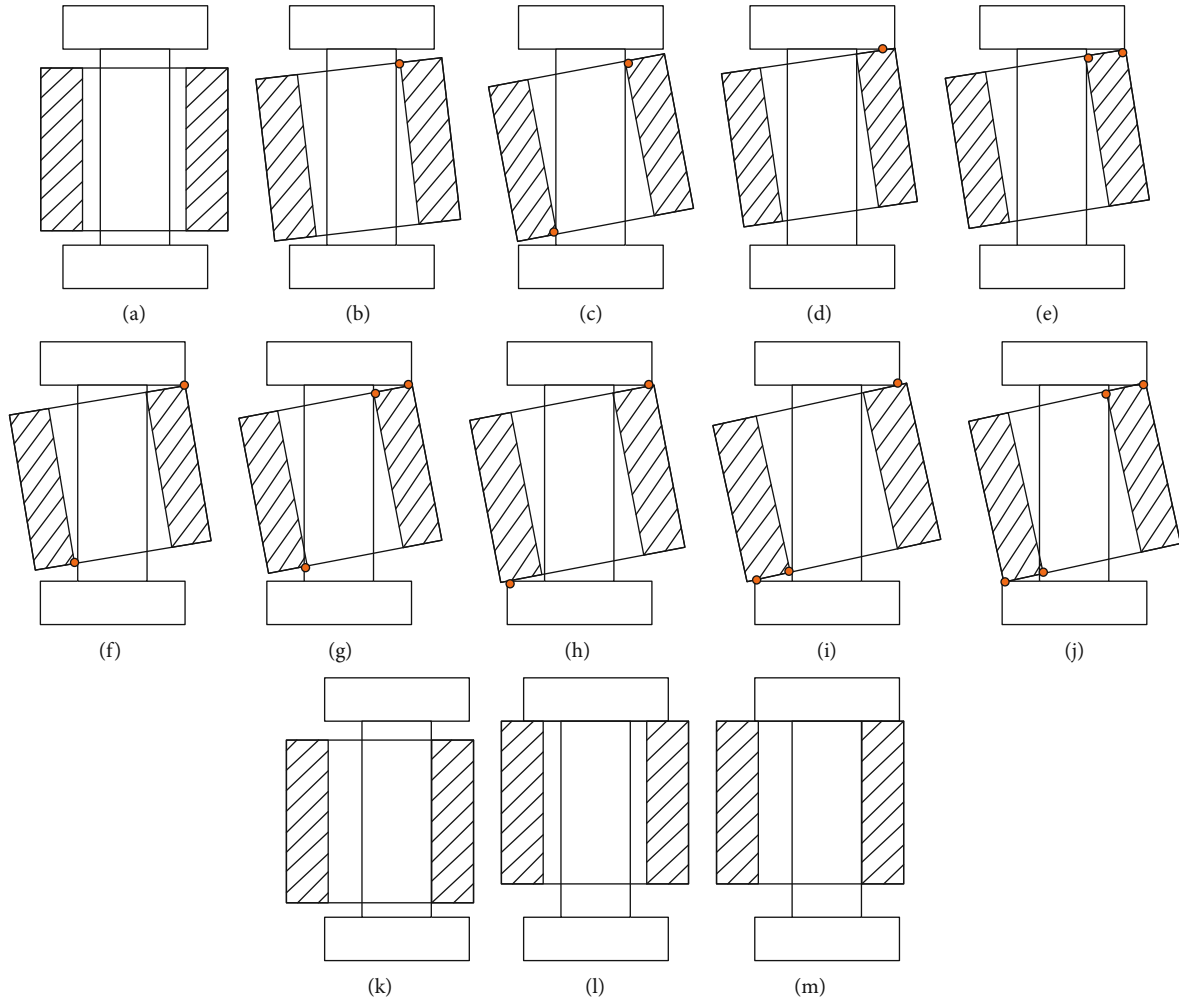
Contact scenarios of revolute joint with 3D clearances.
